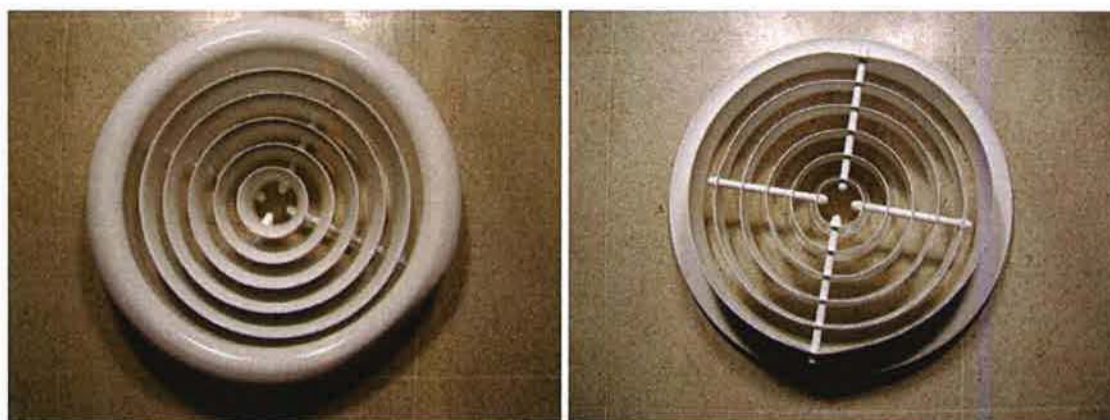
Jet Ceiling Diffuser (Neck: Ø245mm)
